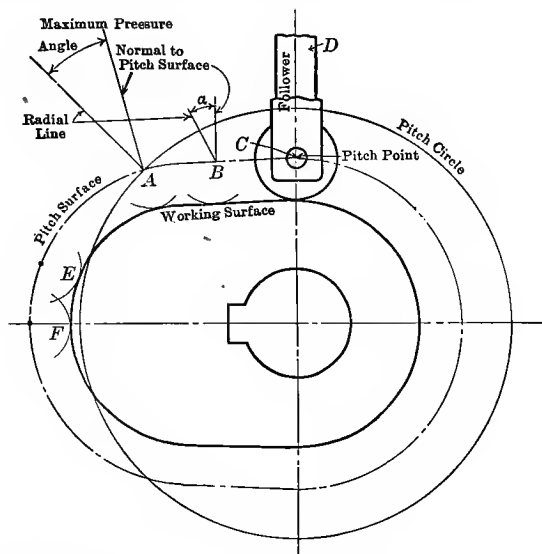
SHOWING NAMES OF SURFACES, LINES, AND POINTS OF A CAM
